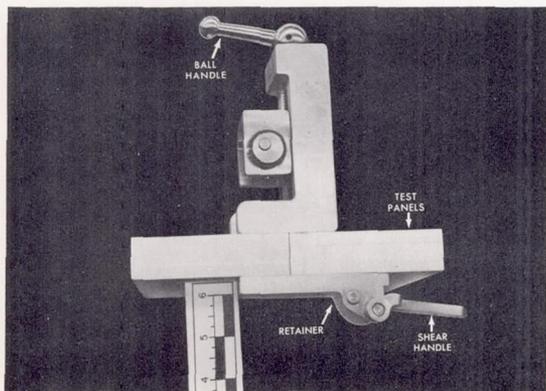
Cross section of weld joint contained by fitup tool.
